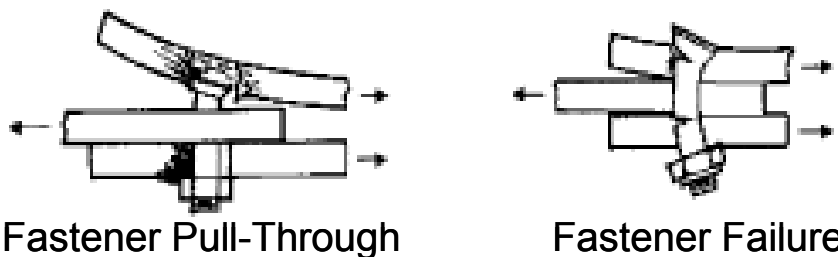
Fastener pull-through and fastener failure in composite laminates
